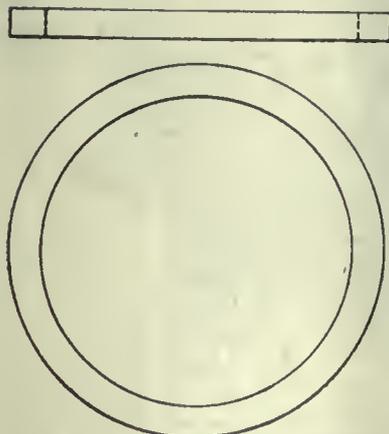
LAYOUT SHOWING OPERATIONS WHEN MACHINING SHOES.
